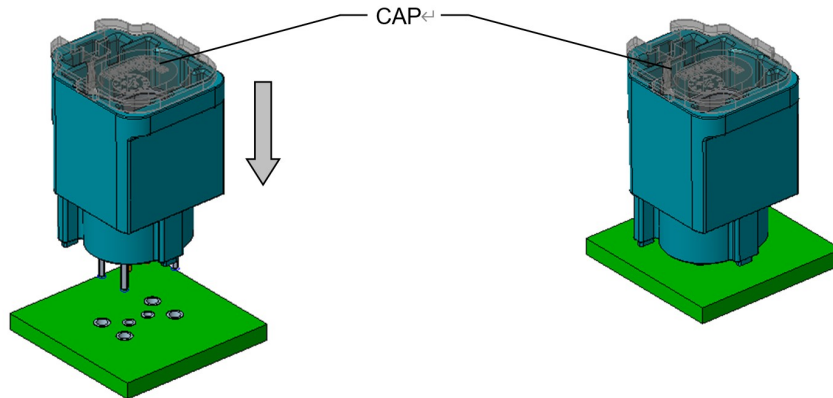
/ Pin Header 1P 180° unsealed, w/o cap, TE-No. 2397137
